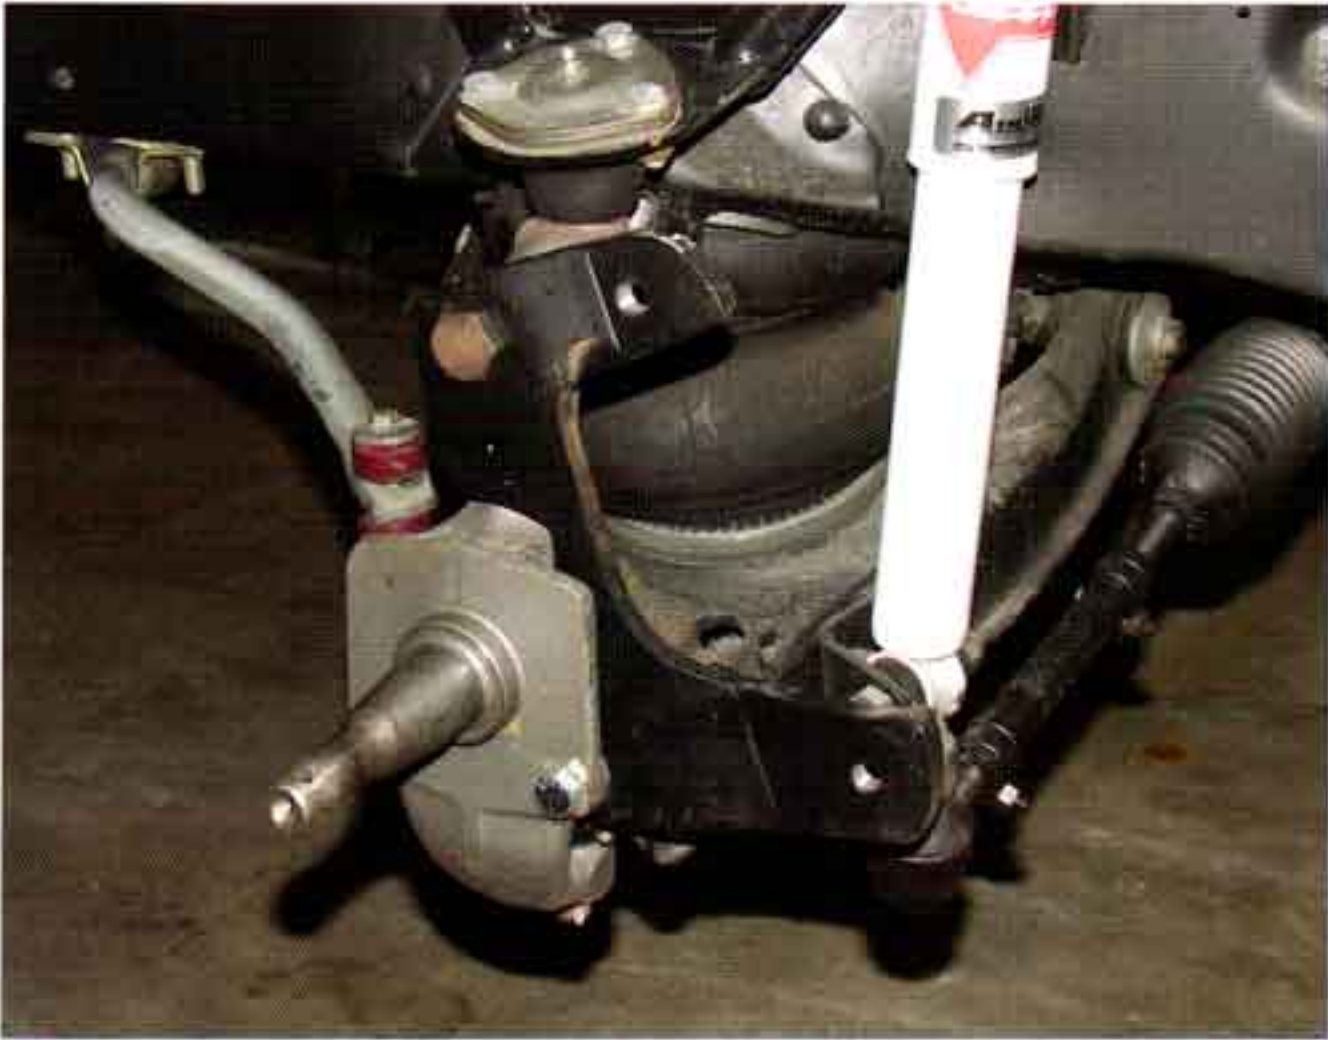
Once all three bolts are in place install the two lock nuts on the lower 7/16" bolts and torque them to 45ft/lbs. The upper 15/16" bolt gets torqued to 95ft/lbs.
